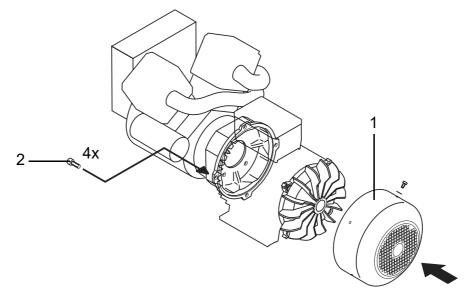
Assembly of brushless single-bearing generators on the motor (2)
